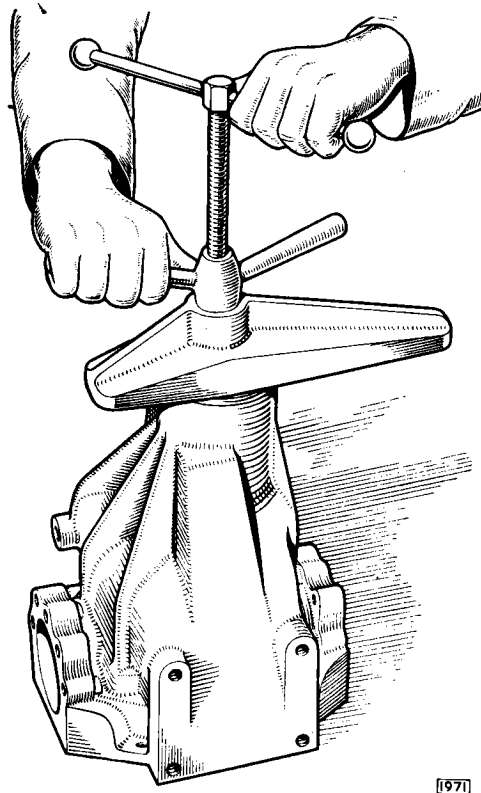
Replacing the pinion inner bearing outer race using Churchill tool SL. 12 with adaptor SL. 12 AB-4
